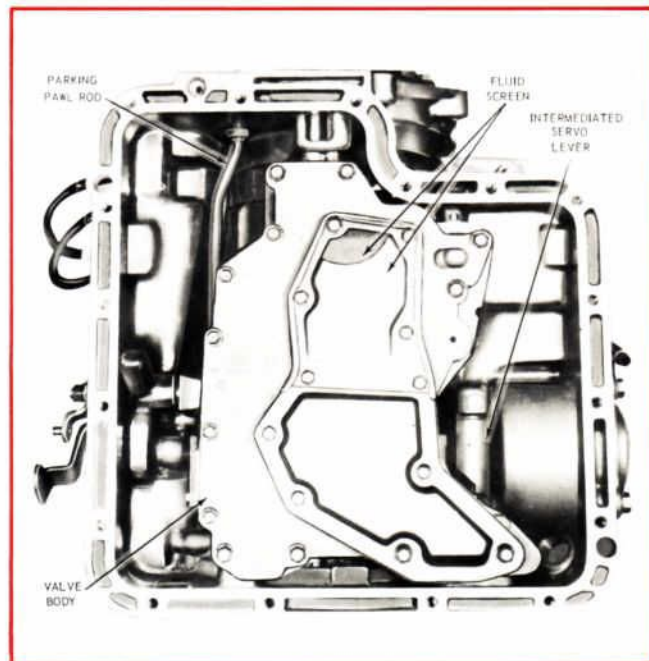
The C6 Filter Screen Attached to Lower Valve Body by Machine Screws
